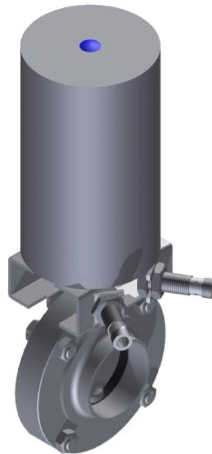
Butterfly valve type SV04 with pneumatic actuator and end position feedback
